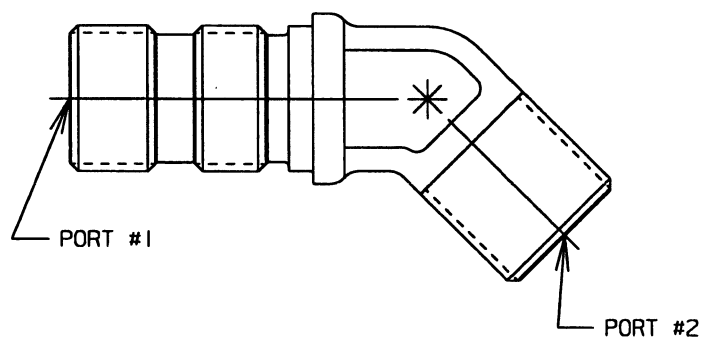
FITTING, ELBOW, 45°, BULKHEAD END FOR OPTIONAL USE
